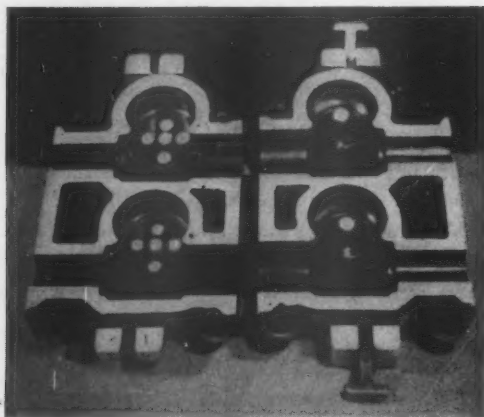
ALUMINUM TWO-GANG HOUSING COREBOX. WHITE OUTLINED PARTS REPRESENT BRASS STRIPS 0.0625 X $\frac{1}{4}$ -IN. FOR BLOW MACHINE WORK, THIS FEATURE INSURES A TIGHTER COREBOX SQUEEZE AND MAKES REPAIRS EASIER. ROUND WHITE PARTS ARE SCREEN VENTS WHICH ALLOW AIR TO EXHAUST FROM THE BOX MORE READILY. THIS RELIEVES THE PRESSURE ON THE BOX, ESPECIALLY THE JOINT FACE.
